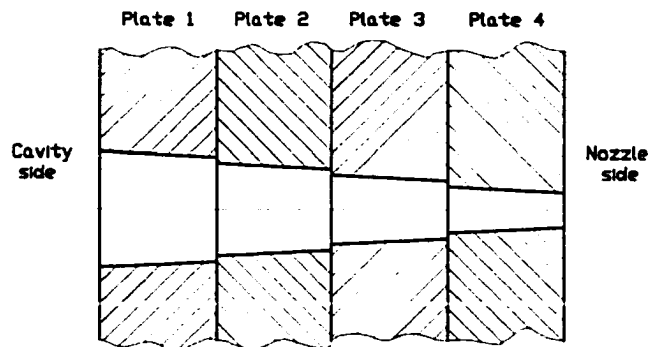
Aspect of the sprue when the mold is made of several plates.
